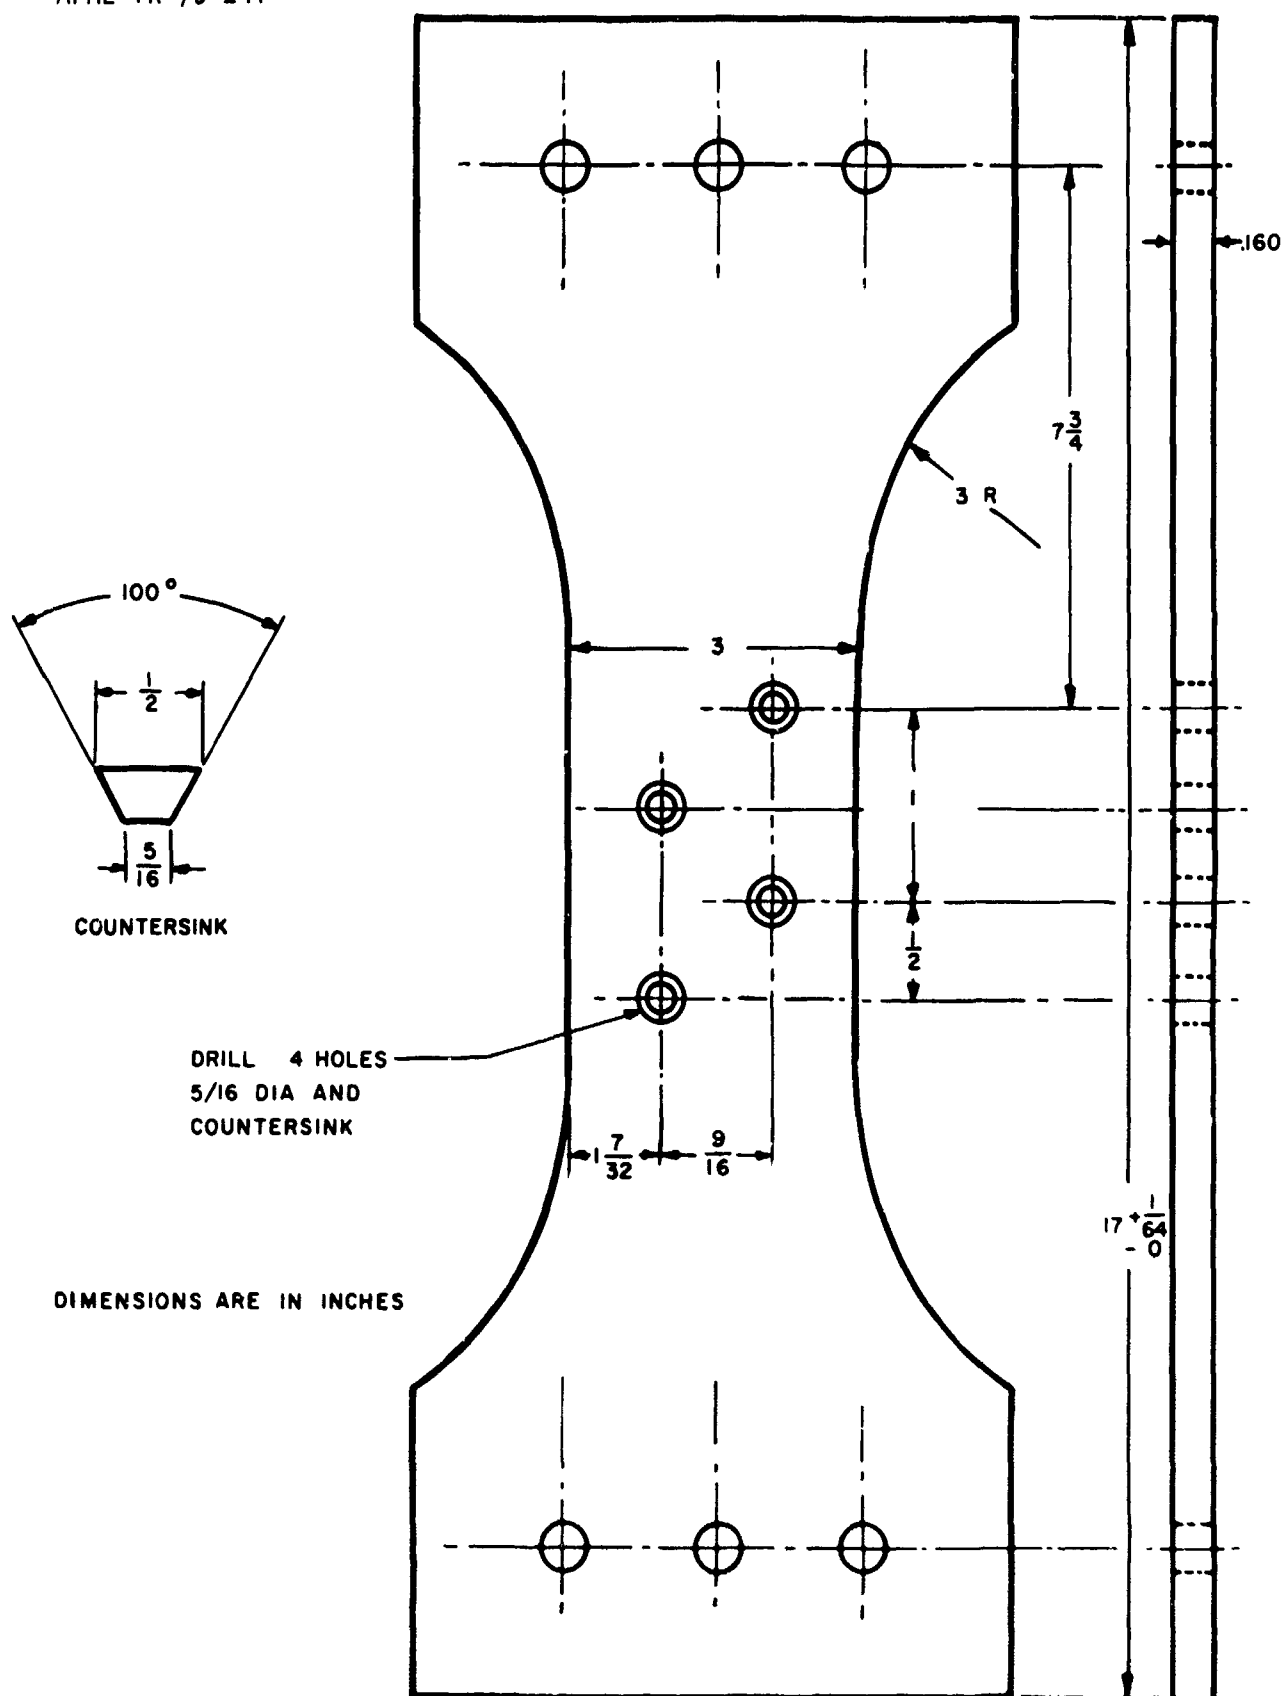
Dimensional Drawing of Fatigue Test Specimens
